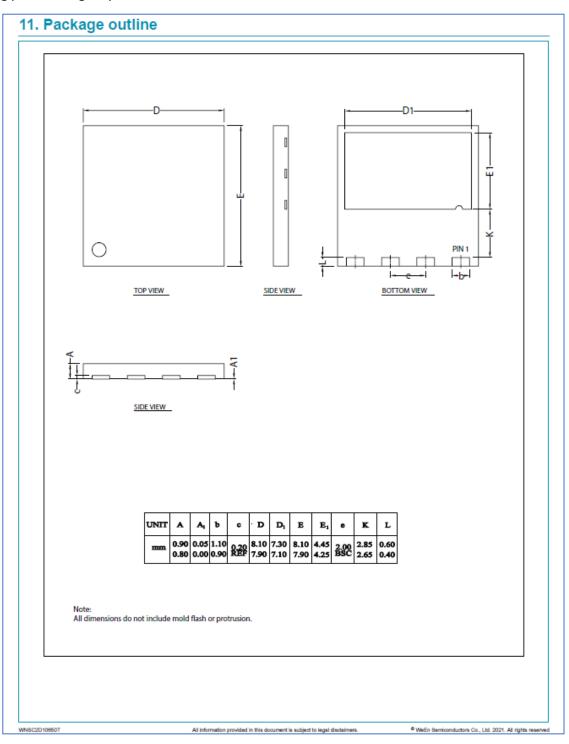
Example of a "DFN" package outline drawing (WNSC2D10650T)
